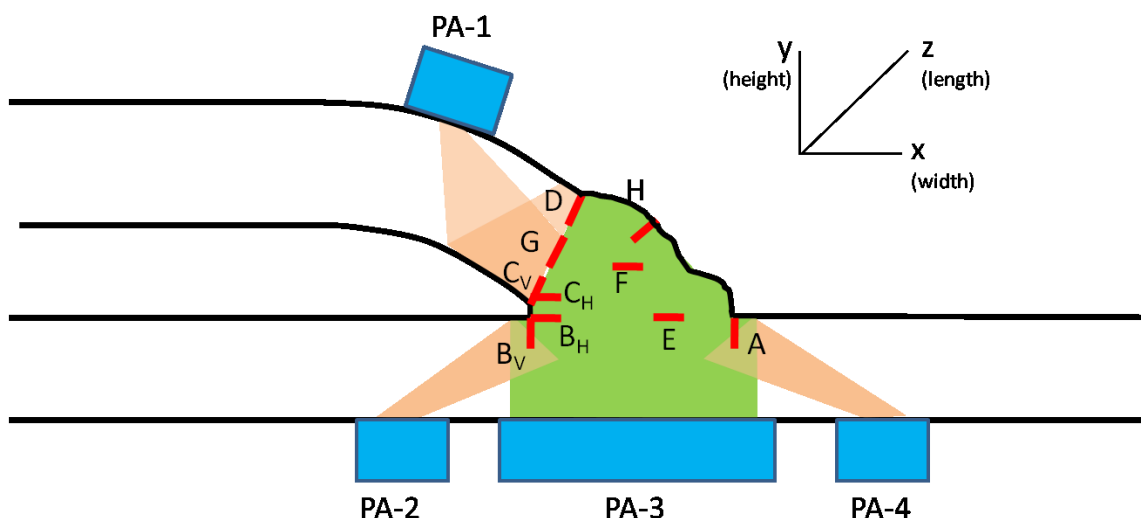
Relevant imperfection types to occur in swaged weld
